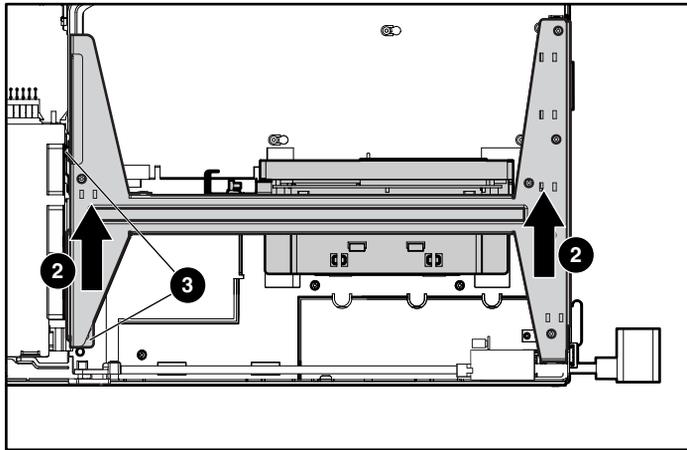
PCI riser board assembly seated properly (expansion boards removed for clarity)
